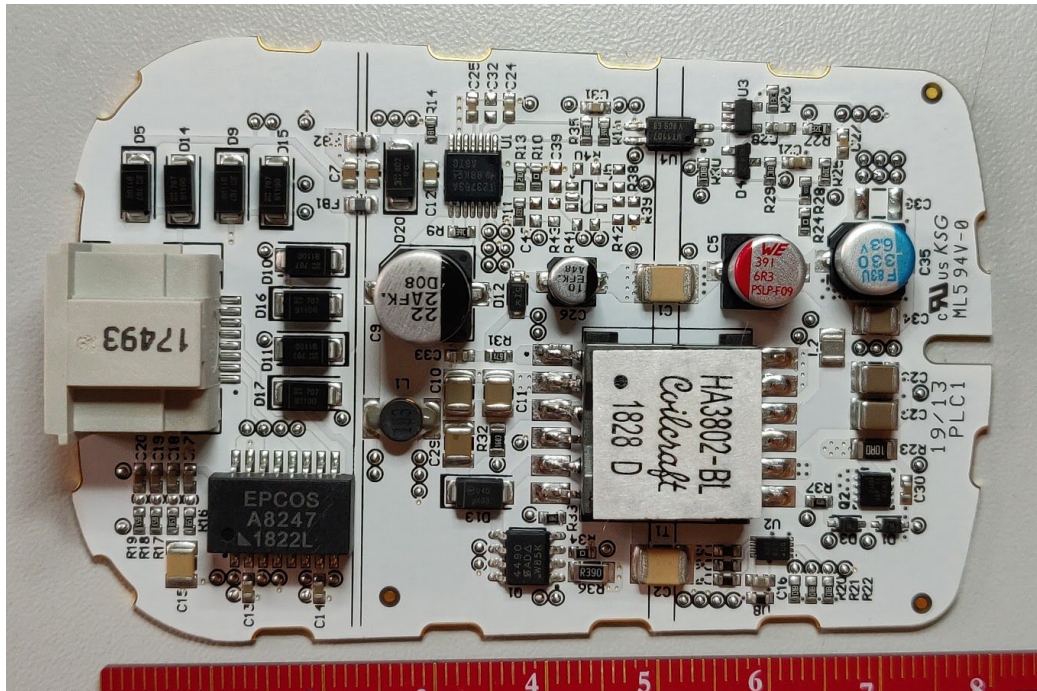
Picture of bottom of PN100578 Connector-PSU-PoE PCBA
